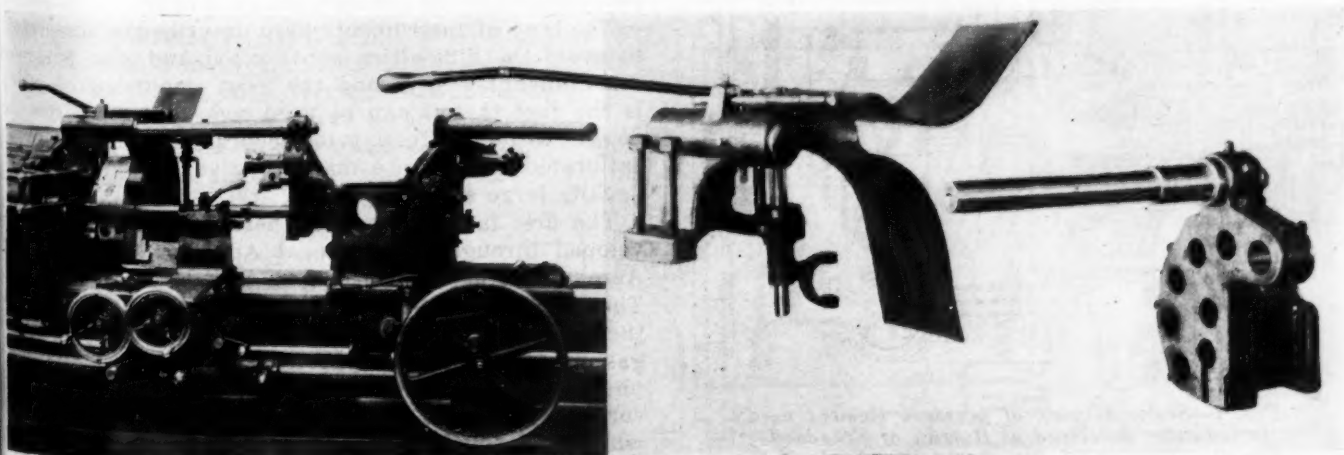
Typical tool arrangement in connection with which pilot bar offers advantages
